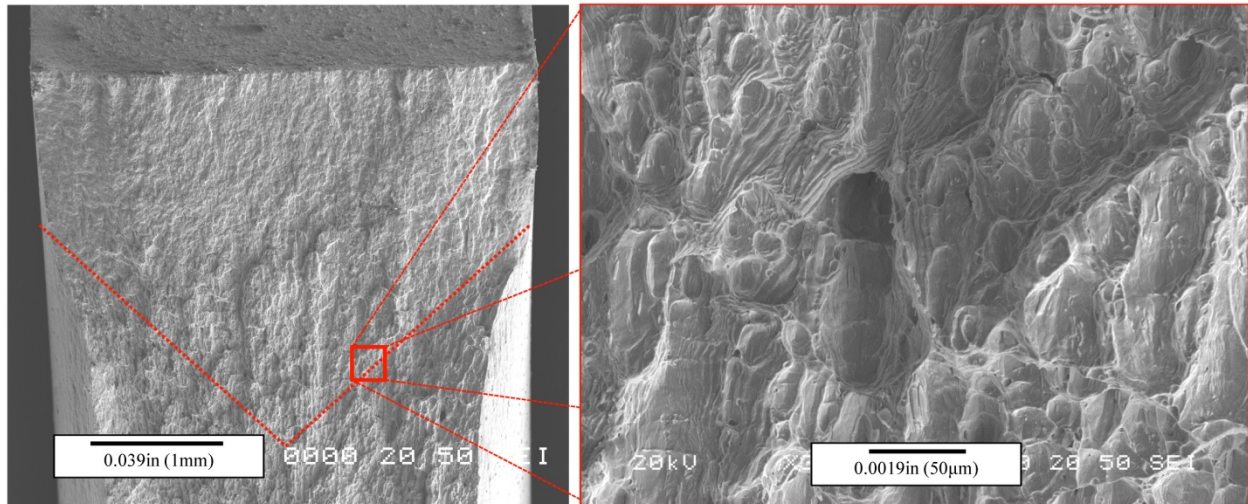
Sample fracture surfaces of specimens tested at 800°F (427°C) as viewed under the SEM.
